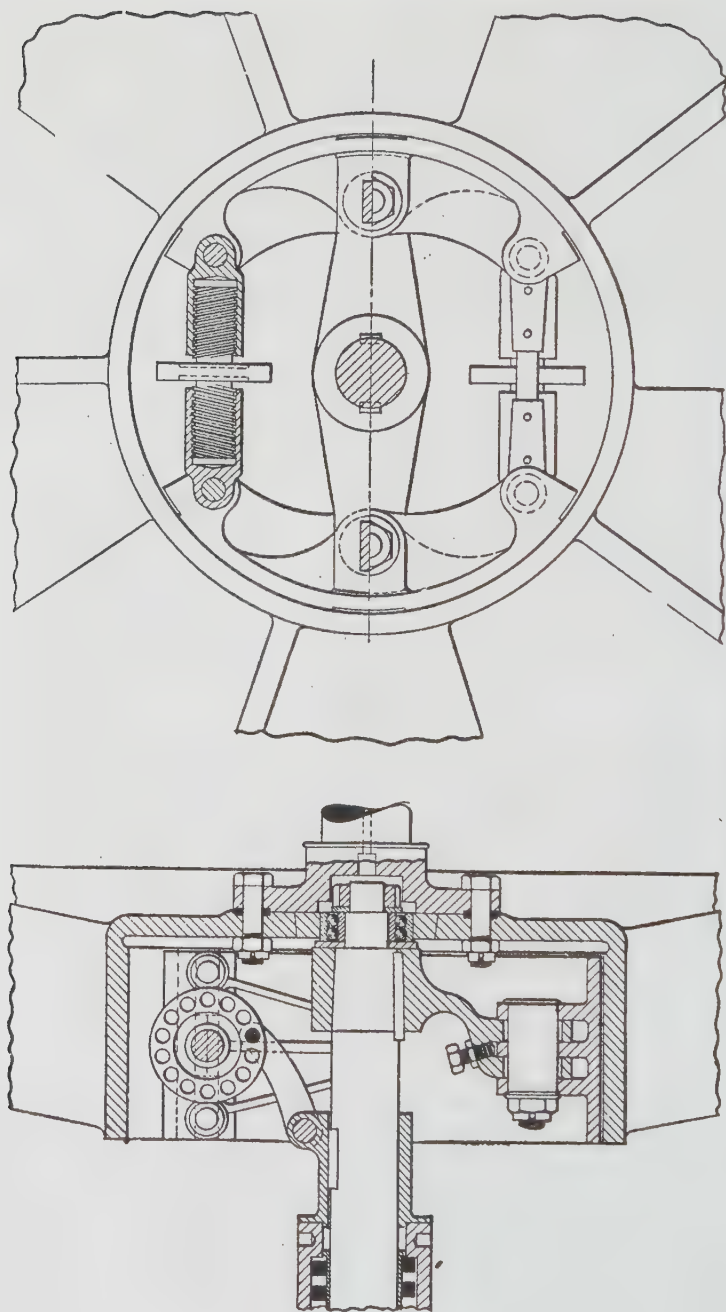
METALLURGIQUE EXPANDING BLOCK CLUTCH.
